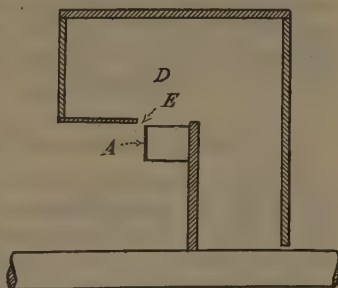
SECTION OF RADIAL-BLADE FAN WITHOUT FLANGE RING
